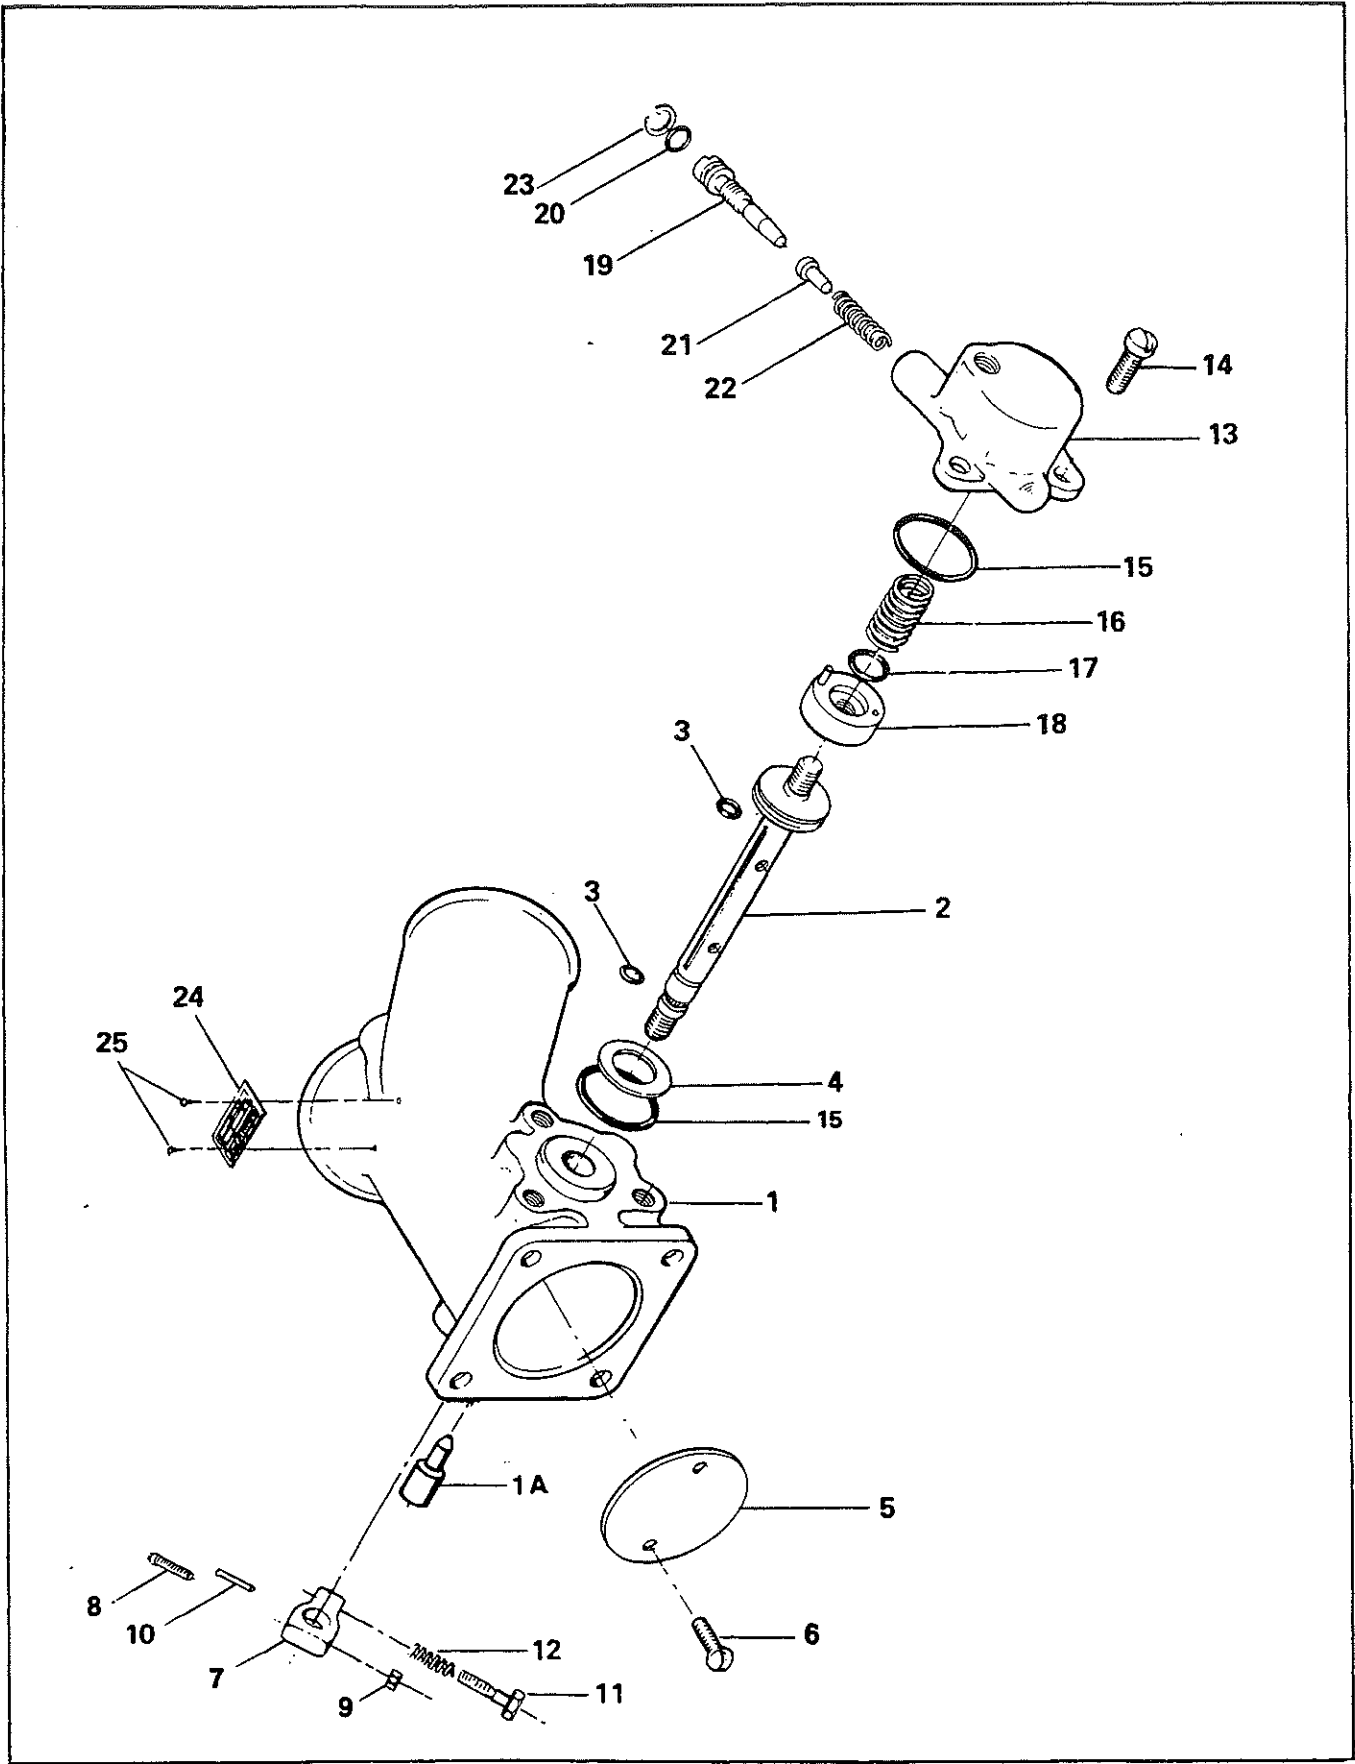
AIR THROTTLE & FUEL METERING ASSEMBLY.
